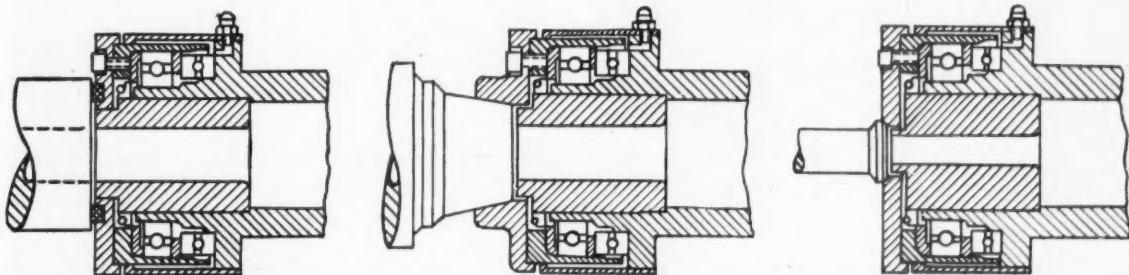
Three methods of workpiece-to-pressure head seal used on V.D.F. machines. (Left) Conventional type of rubber-to-metal seal. (Centre) The preferred type of slow-taper metal-to-metal seal. (Right) Acute angle profile seal to suit component design. It is doubtful whether this type of seal is entirely satisfactory
